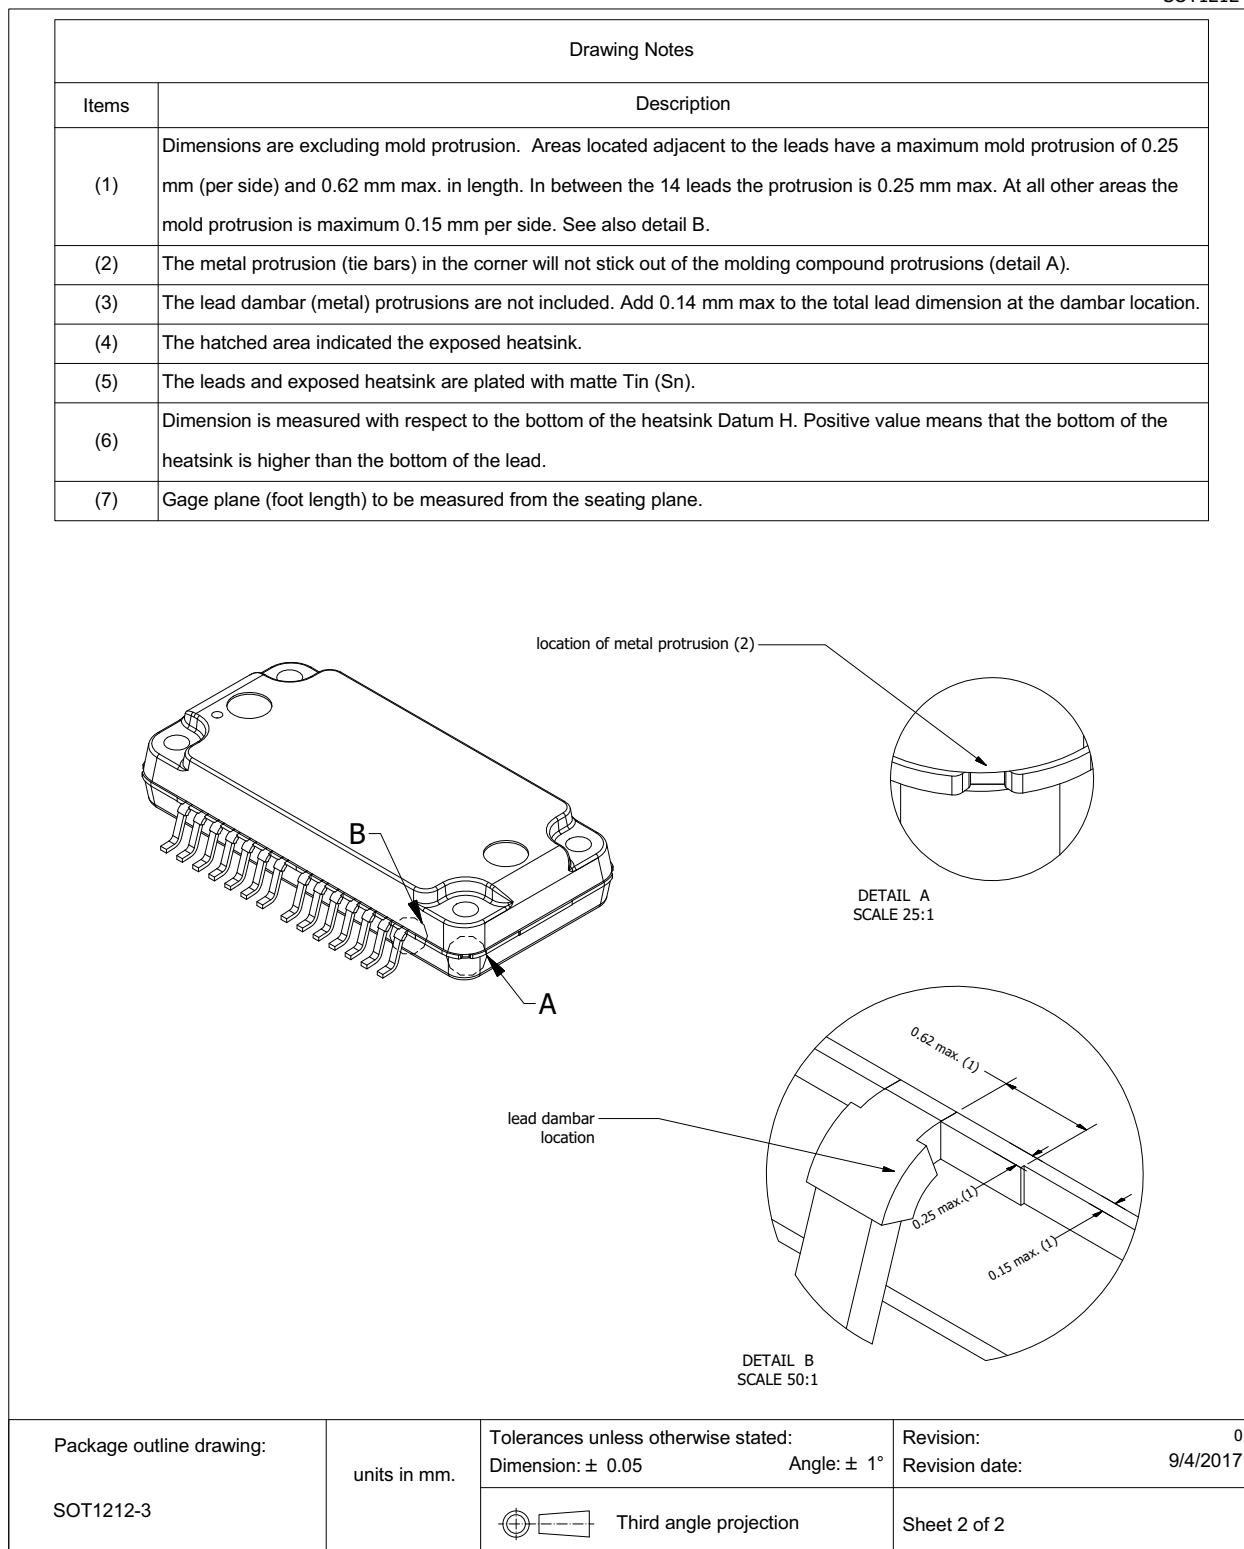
Package outline SOT1212-3 (sheet 2 of 2)
